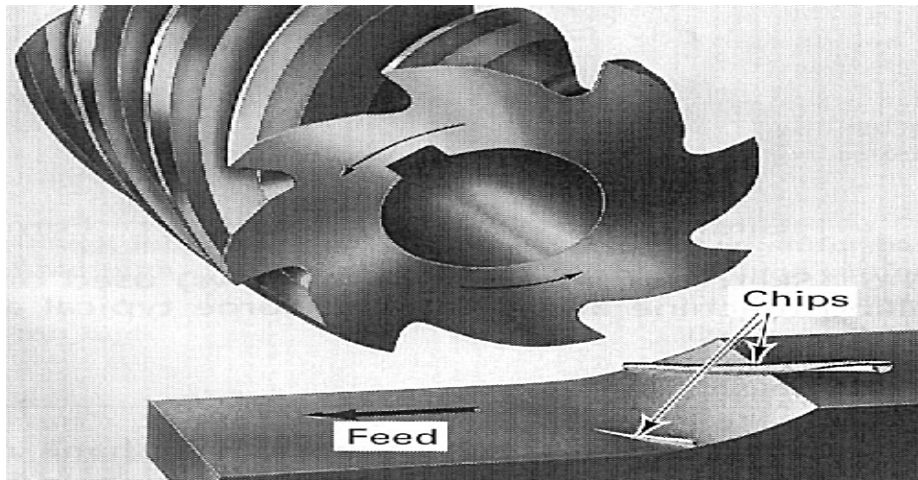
Milling operation. The cutter is lifted to show the chips, and the work, transient, and machined surfaces.
